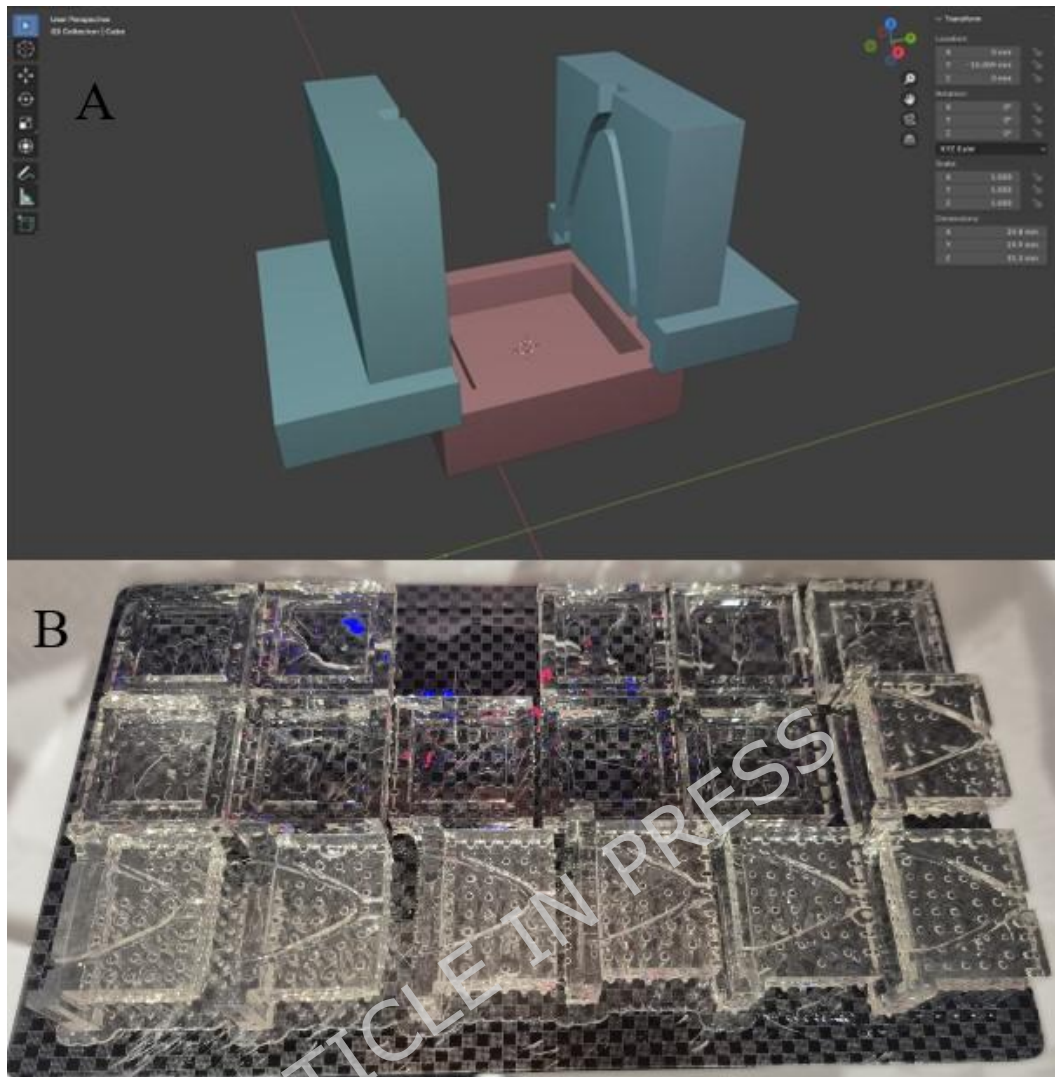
Screenshot of mold model design (A), and photo of after mold printing (B).
